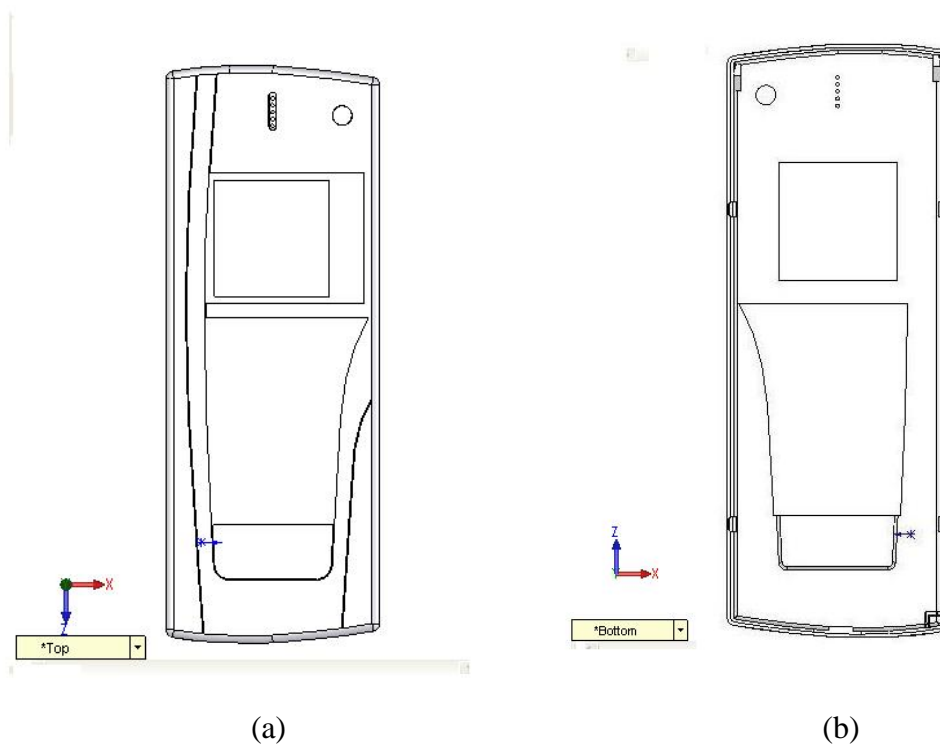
Top view (a) and bottom view (b) CAD model of Nokia 9500 mobile phone casing
